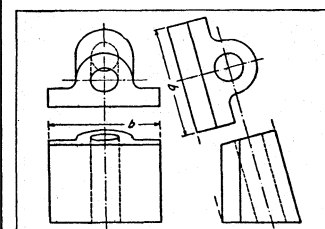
FRONT AUXILIARY VIEW, PROJECTED FROM SIDE VIEW
